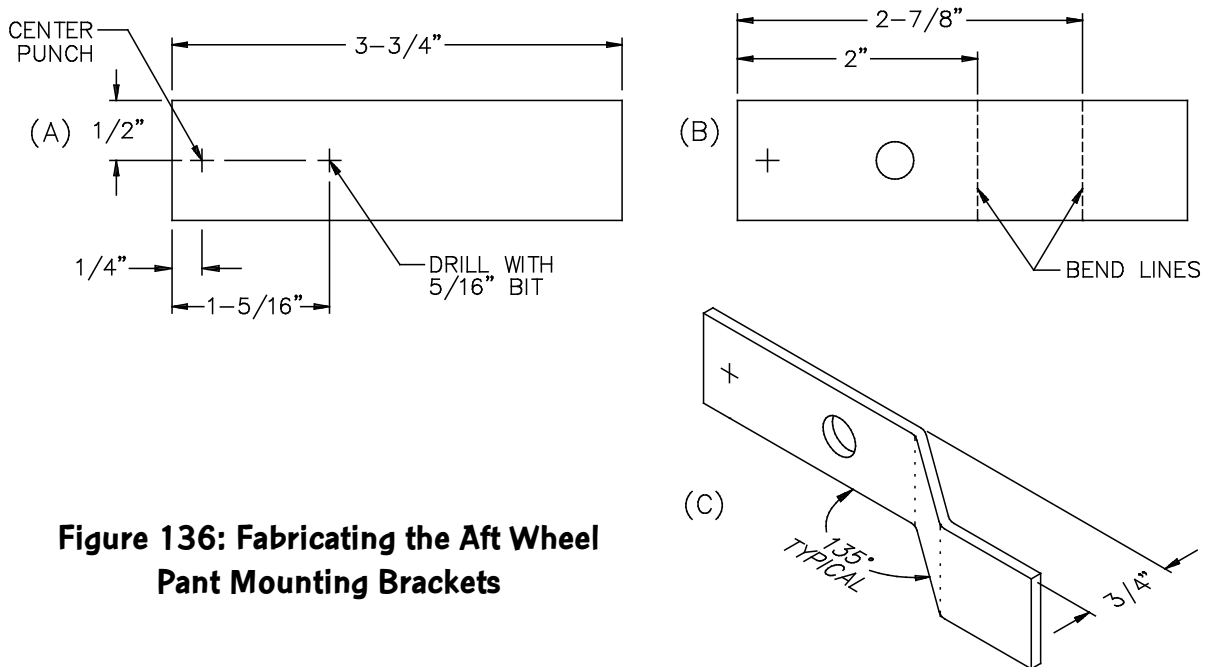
Fabricating the Aft Wheel Pant Mounting Brackets
